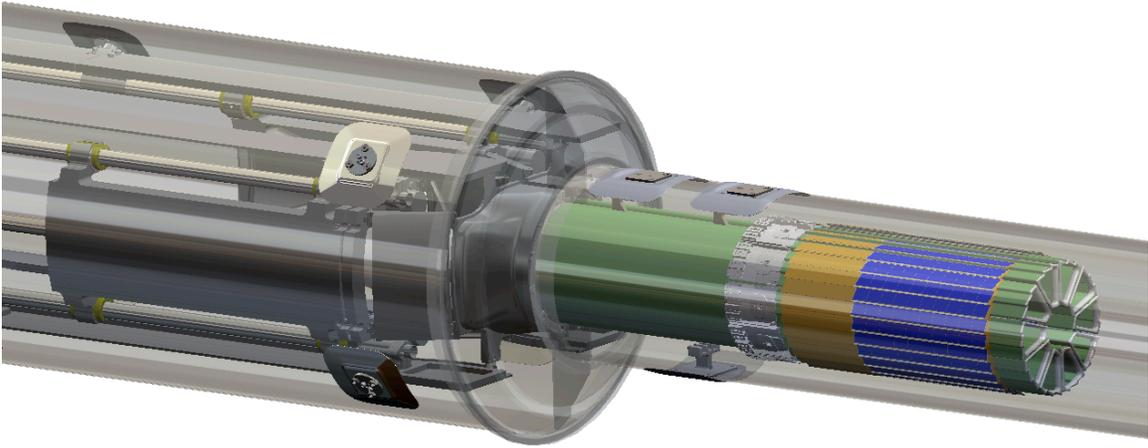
Detector assembly in the installed position supported with three kinematic mounts.
